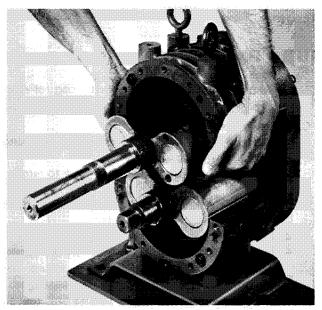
REMOVING DRIVE ROTOR FROM GEAR END PLATE
